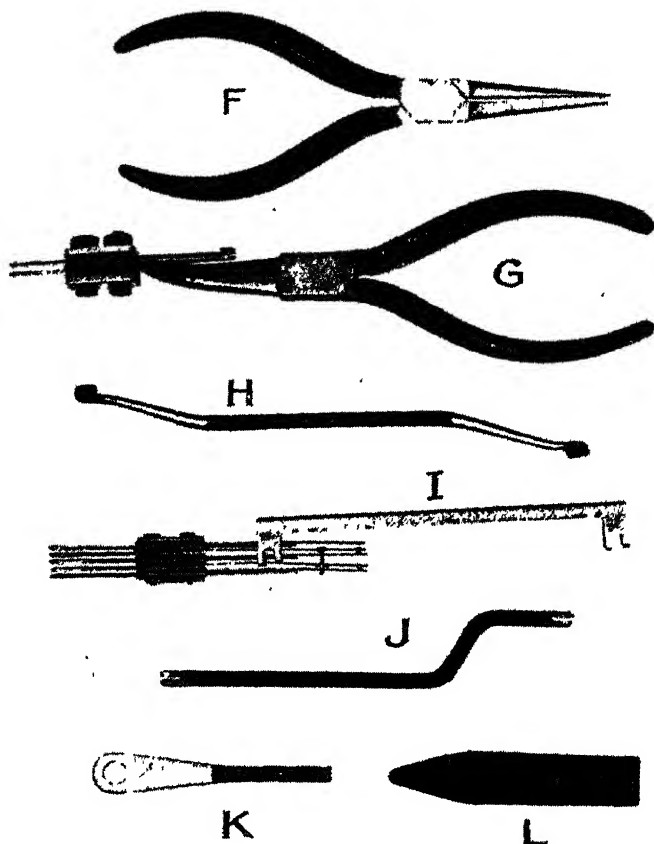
TOOLS FOR SPRING ADJUSTMENTS
